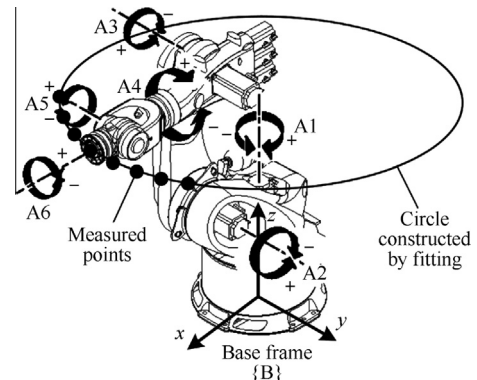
Method to get robot's axis 1 using a laser tracker.
